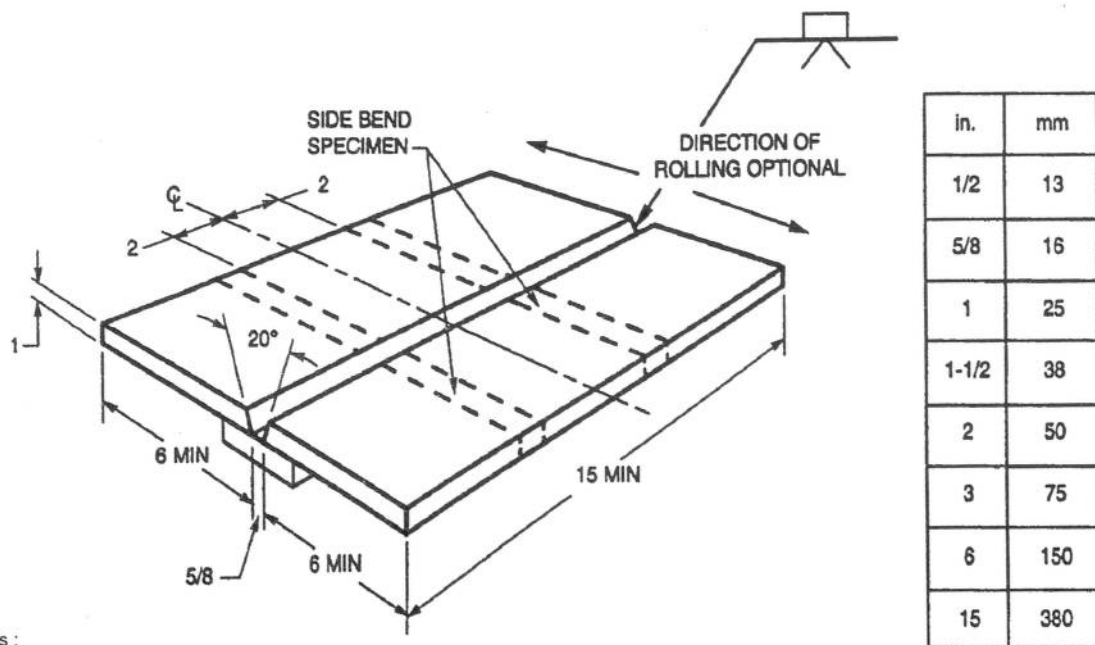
Test Plate for Unlimited Thickness - welding Operator Qualification (see 4.23.2)
